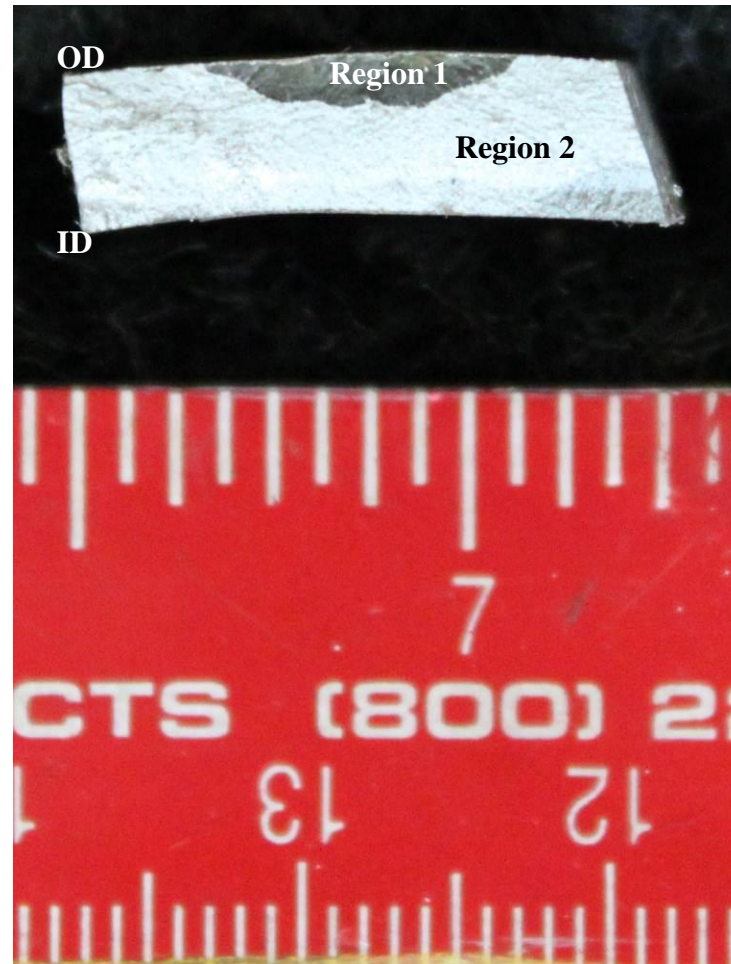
Photograph of the fracture surface from Crack Colony 11.
